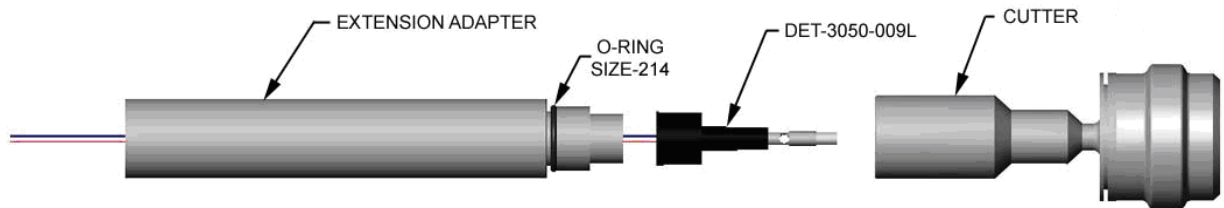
Arming Method for NT Super Tubing Cutters - Exploded View
